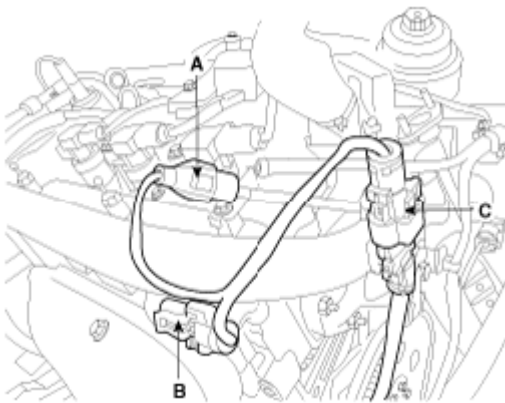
Identifying Connectors For Oil Pressure Switch, LH Exhaust Camshaft CMP Sensor, & LH Oxygen Sensor
